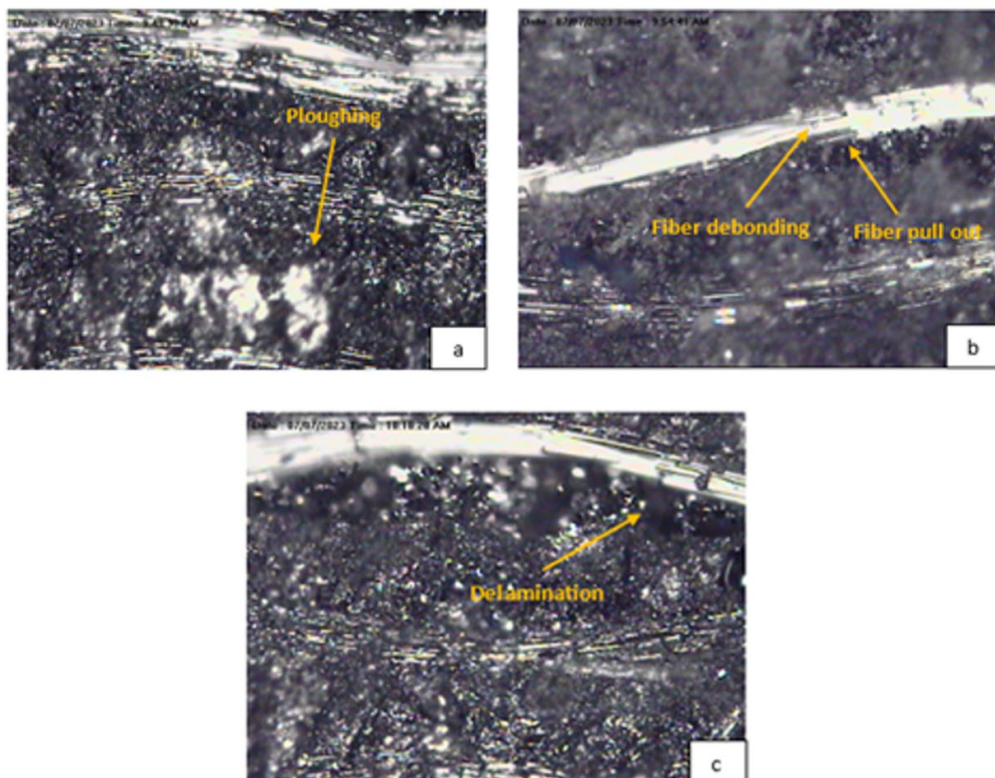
Machined surface image using optical microscope (a) Ploughing; (b) Fiber debonding and fiber pull out; (c) Delamination
